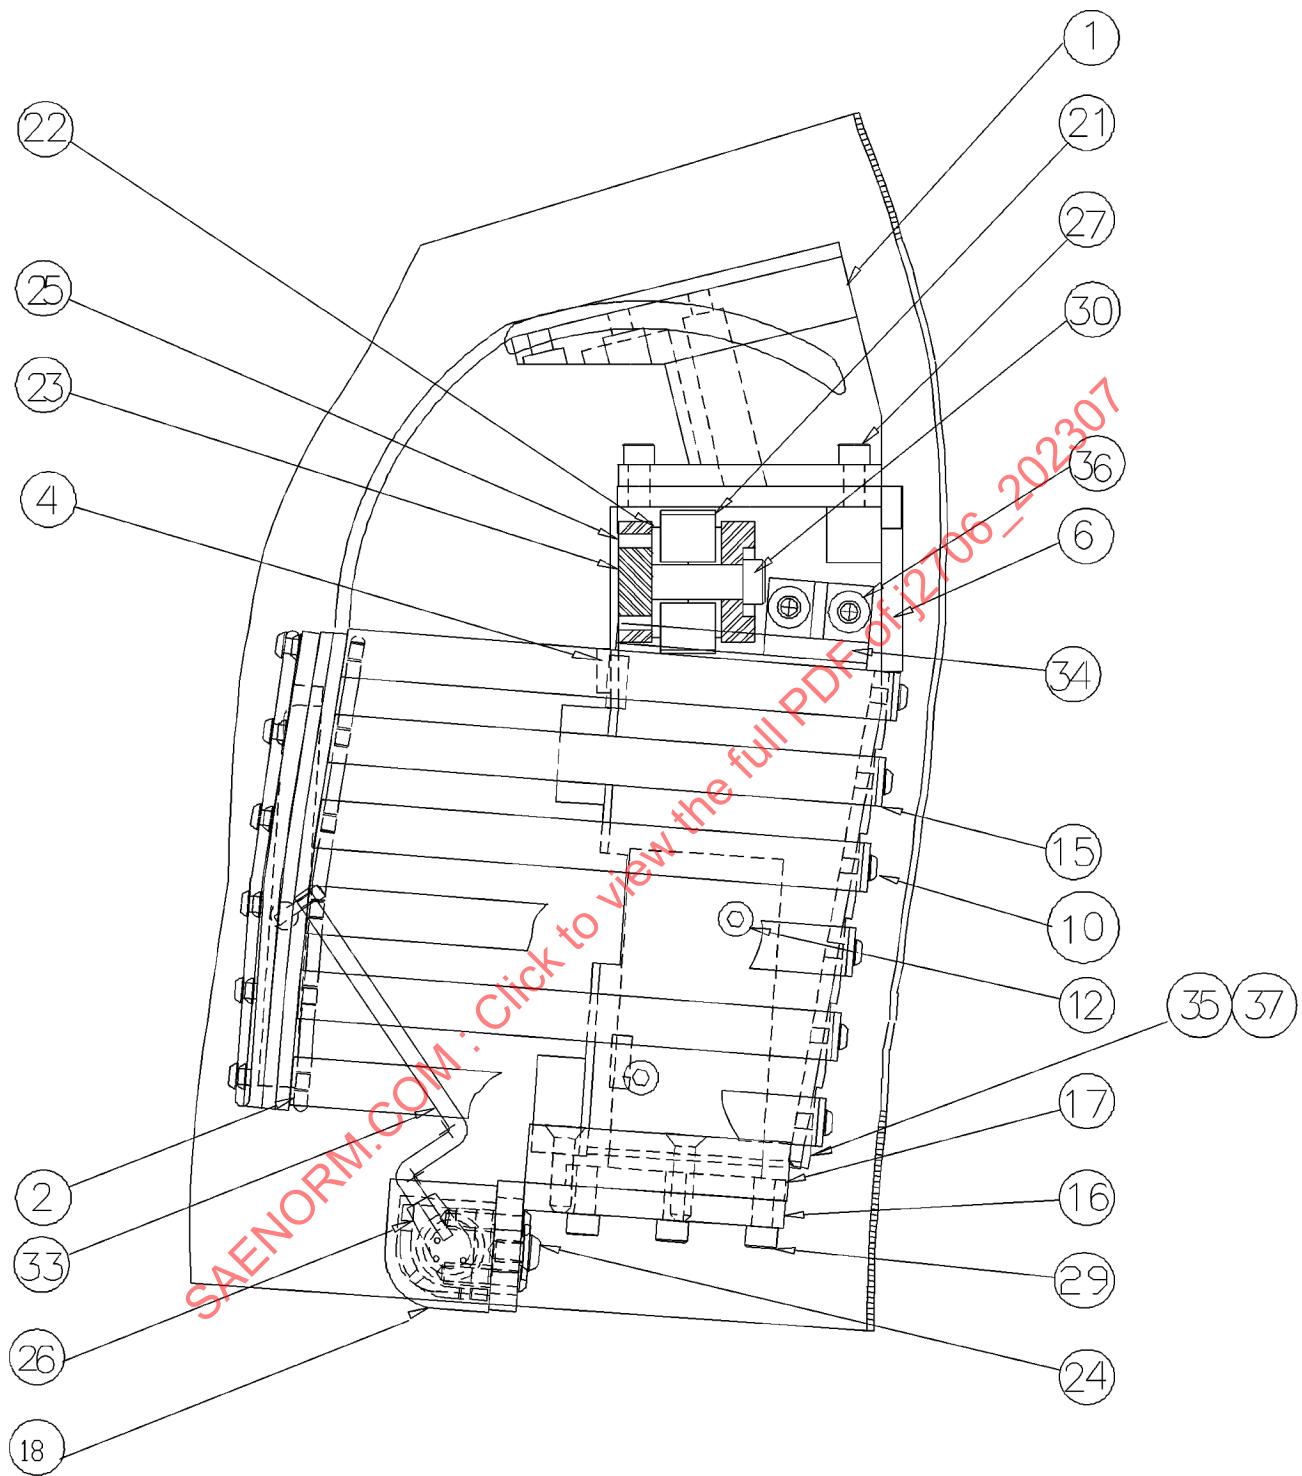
SIDE VIEW OF CHEST ASSEMBLY
